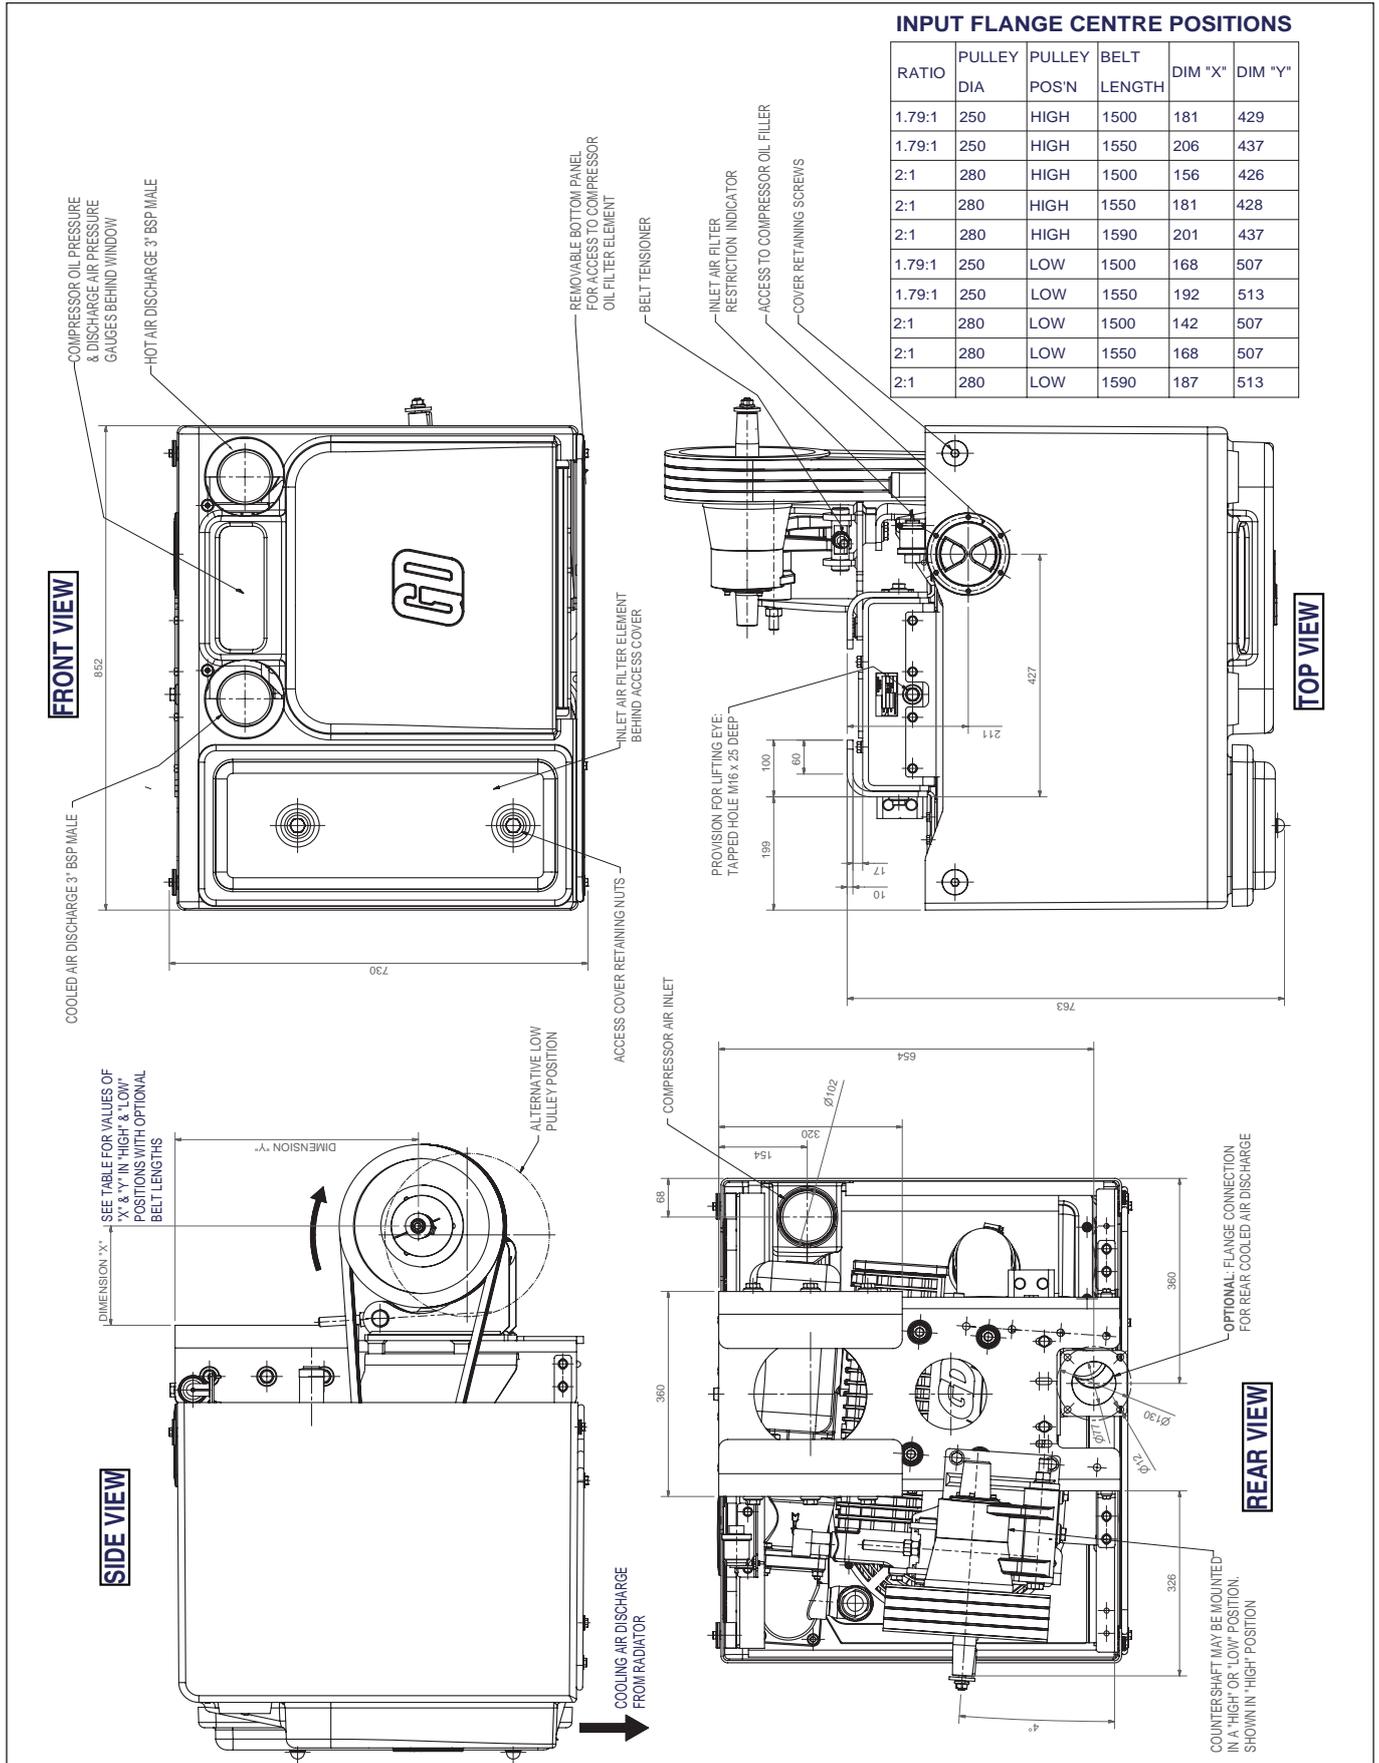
General Arrangement Drawing - BL1000 Clockwise (Right Hand) Rotation Package (Pulley Shown in High Position)
